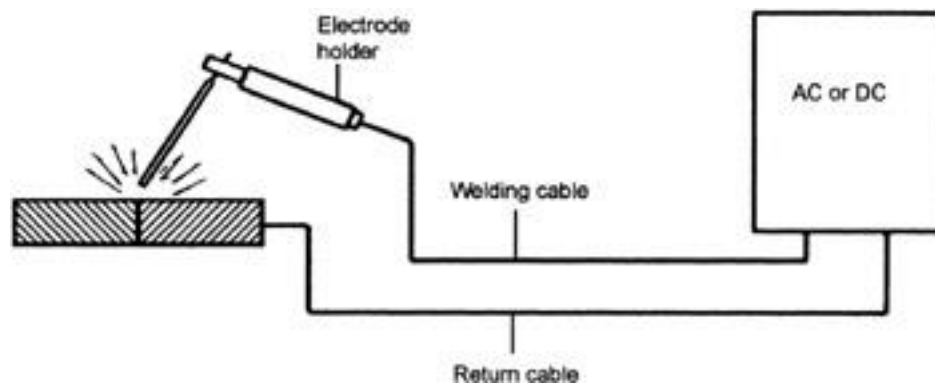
Basic arc welding circuit diagram [2]
